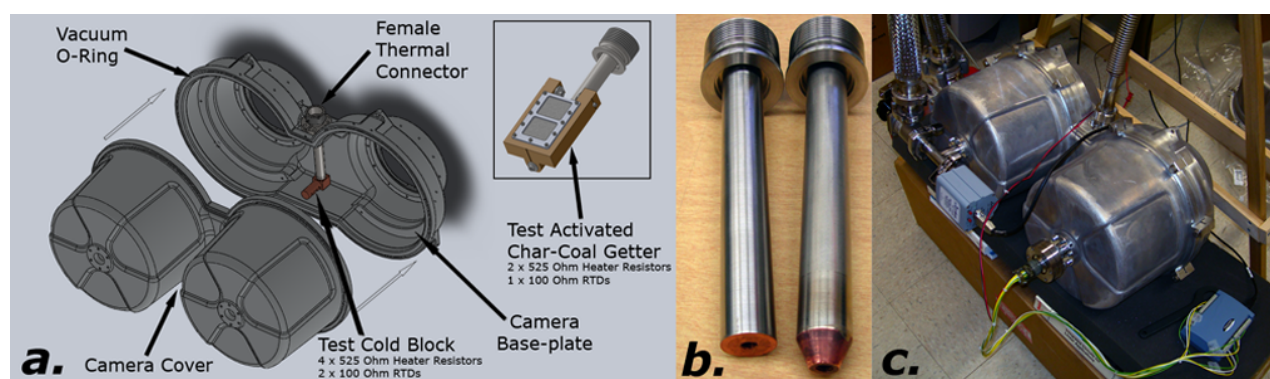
The test cryostat for testing the 6-inch production model connector. *a*) Exploded view of a prototype VIRUS camera vacuum vessel casting showing the 6-inch bayonet and test cold block where RTDs and heaters are mounted. Inset: the prototype activated charcoal getter, which takes the place of the test cold block in more recent tests, is shown attached to the female bayonet. *b*) Tapered and flat male copper plug ends. The flat end is used when mounting the prototype getter. *c*) A photo of the 6-inch test cryostat setup. Note the attached thermal connector.
